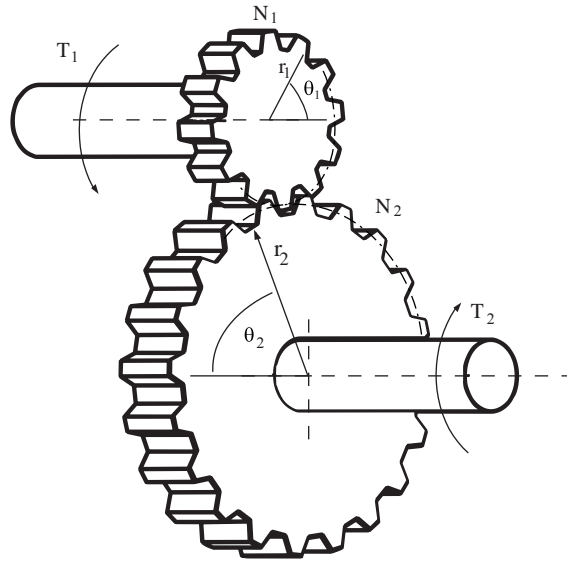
Rotary to rotary motion conversion mechanisms: gear mechanism.
